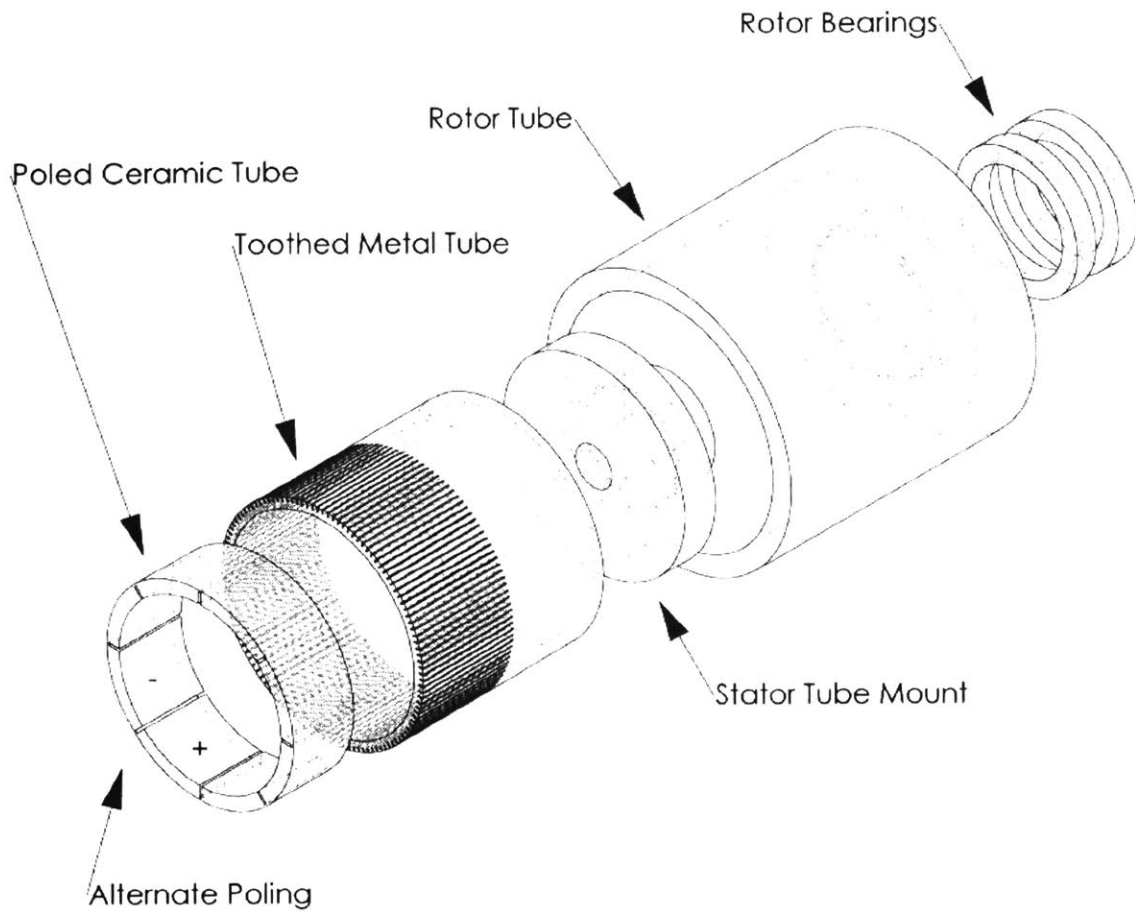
Travelling Wave Tube Ultrasonic Motor Design – Exploded View
